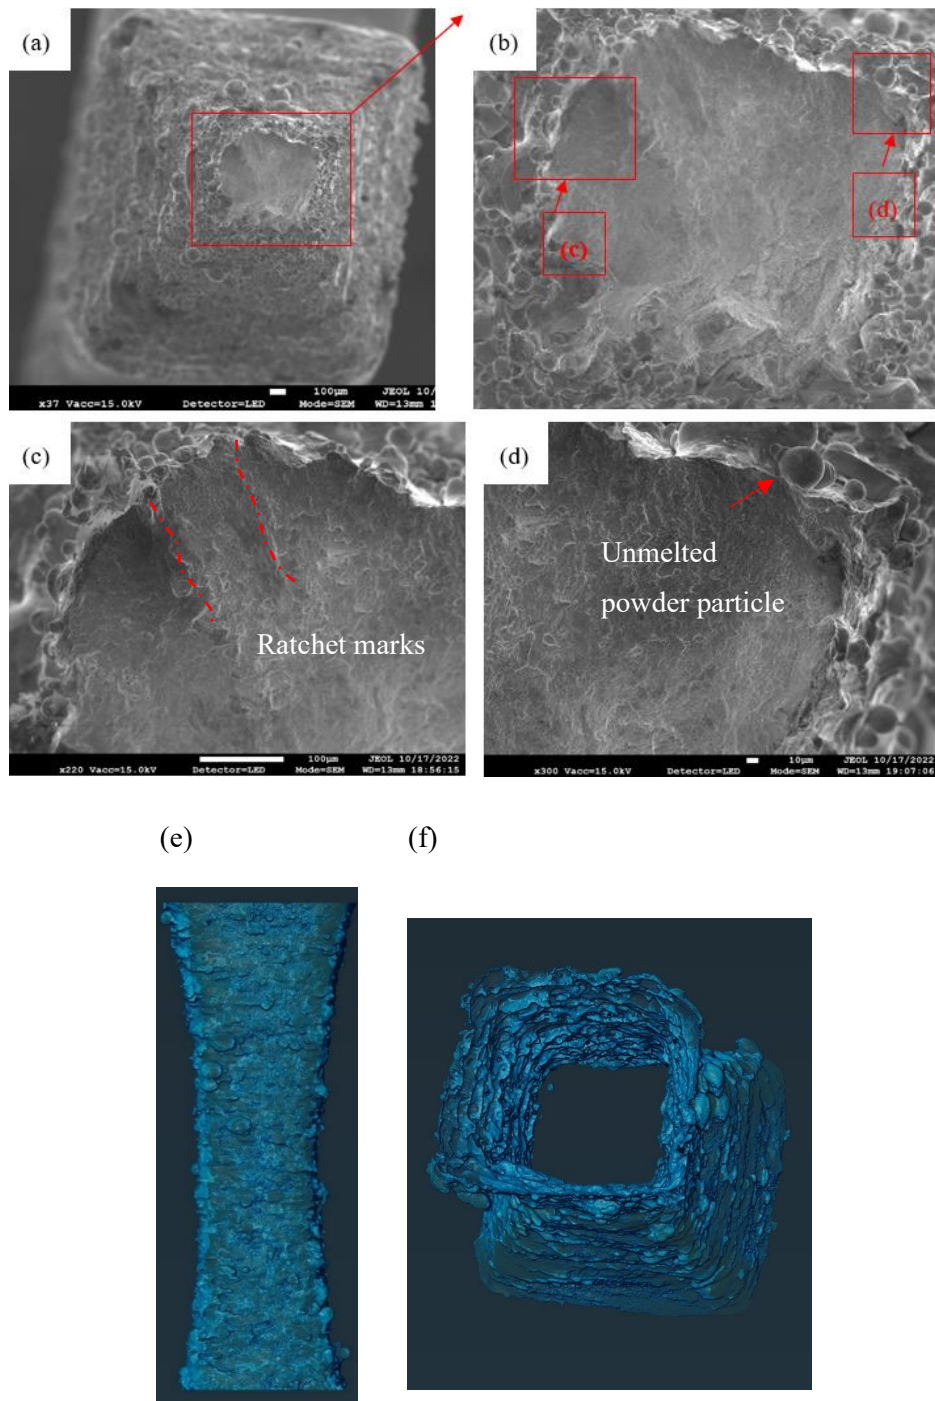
Fracture surface of B2 as-built micro tensile specimen under cyclic loading with  $\sigma_{Max} = 523$  MPa at  $R = 0.1$ ;  $N_f = 13$  cycle. (a) fractured micro tensile specimen (b) macro view of the fracture surface (c) ratchet marks resulting severe plastic deformation (d) unmelted powder particle at the surface. A qualitative representation of the surface roughness profile of the as-built micro tensile specimen (e) side view (f) isometric view.
